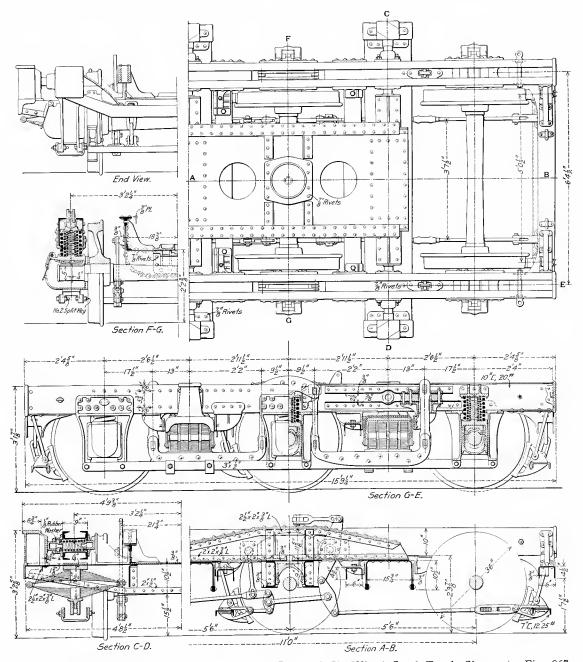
General Arrangement of Pennsylvania Railroad Six-Wheel Steel Truck Shown in Fig. 967.
